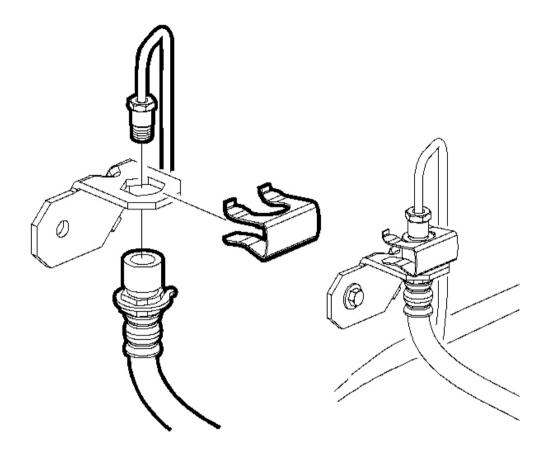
Removing/Installing Brake Hose Courtesy of GENERAL MOTORS CORP.
